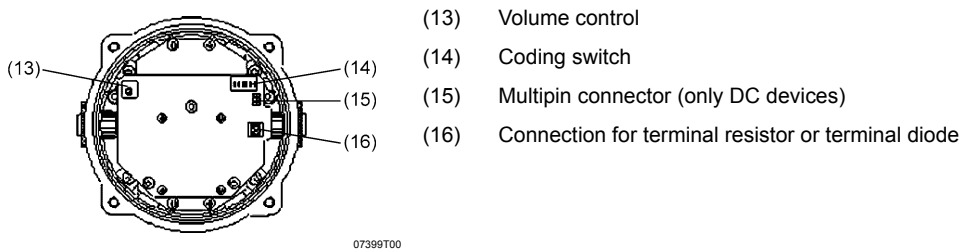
Board in the flameproof enclosure of type 8493/11-21 horn
